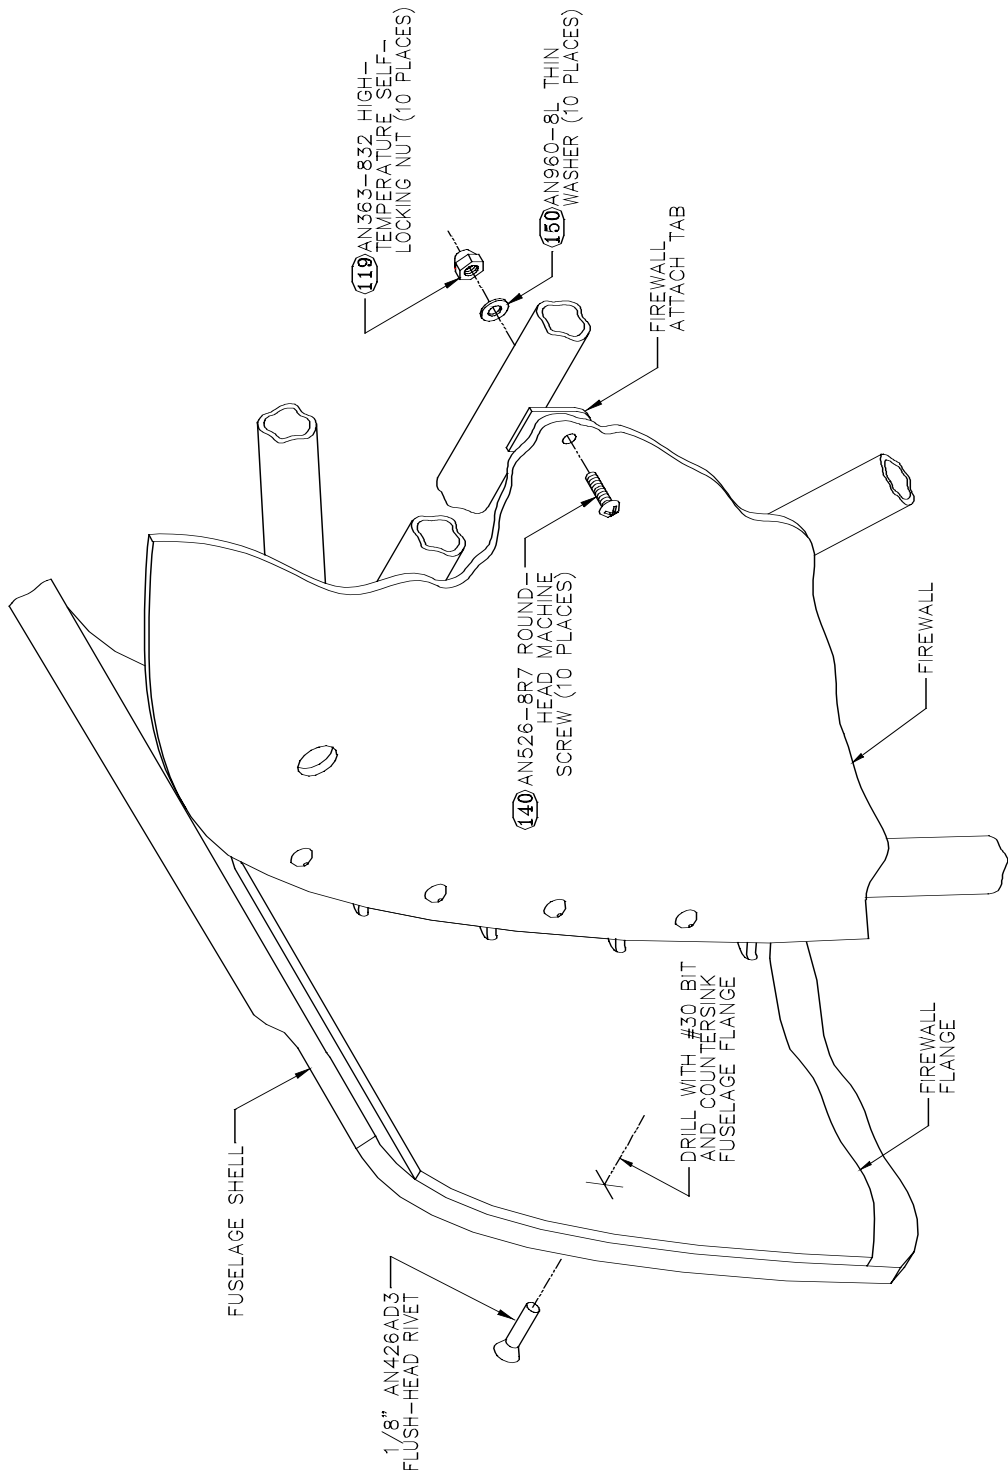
Fastening the Firewall Assembly to the Fuselage Cowl Flange
